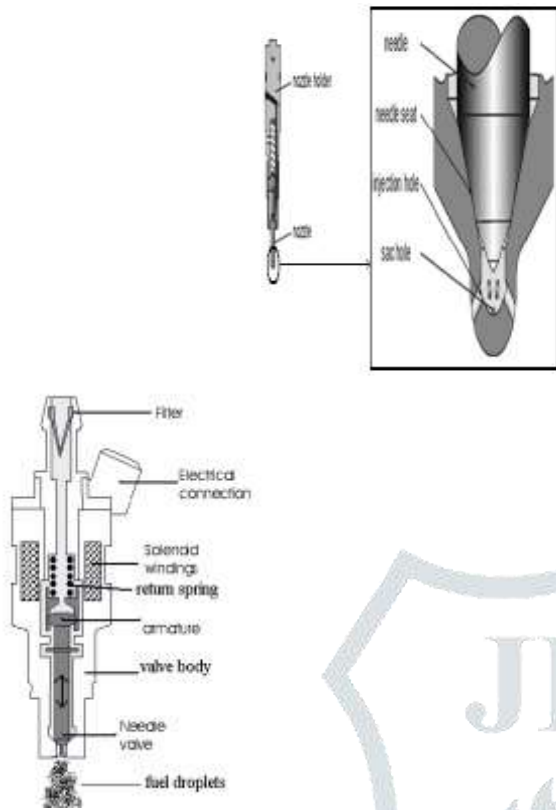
Cut section of the injector. Fig 2.4 Cross section of the nozzle tip.
